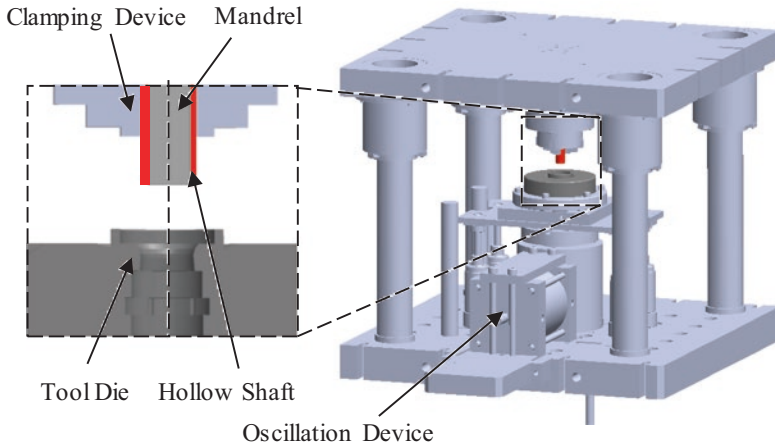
Tool system for superimposed oscillation experiments for the forming of an axial geometry on a hollow shaft
